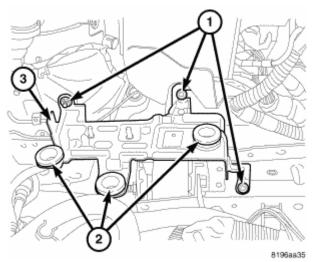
AIR CLEANER HOUSING BRACKET Courtesy of CHRYSLER LLC
